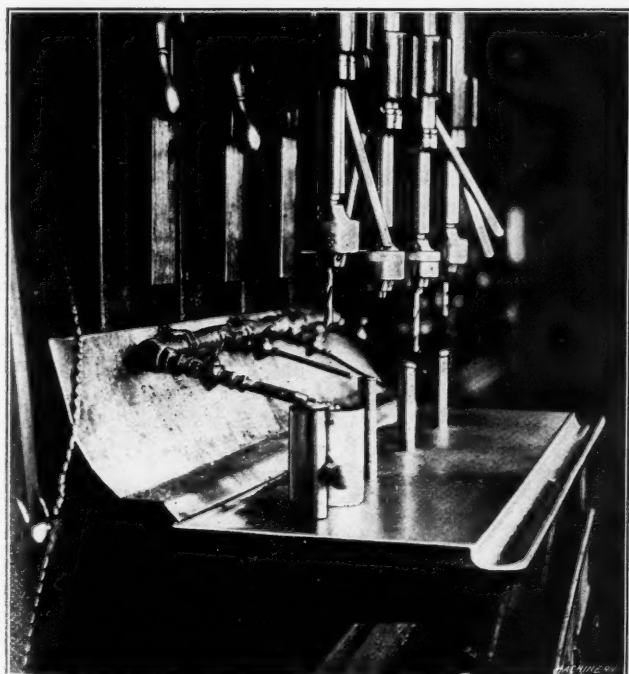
Illustration of High-speed Drilling Machine showing Lack of Chip Room in Table Channels
